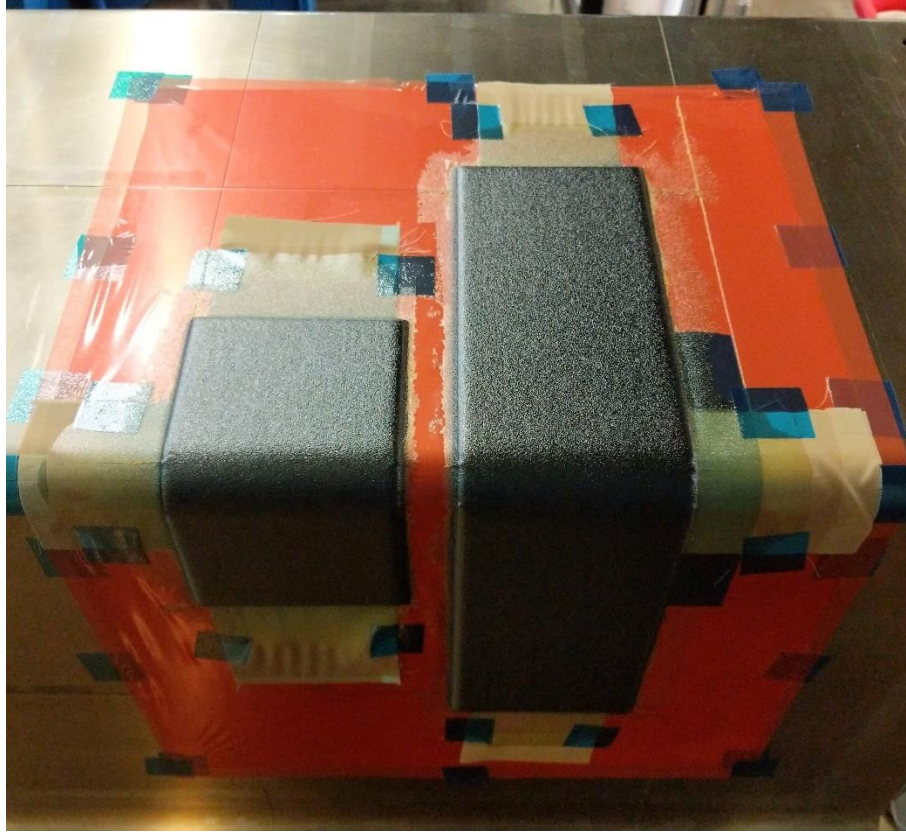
Typical specimens at tooling location 1 and 2 during demolding. Specimen edges were tapered from the vacuum bag. Resin bled to where FEP sheet (removed in this figure) stops
